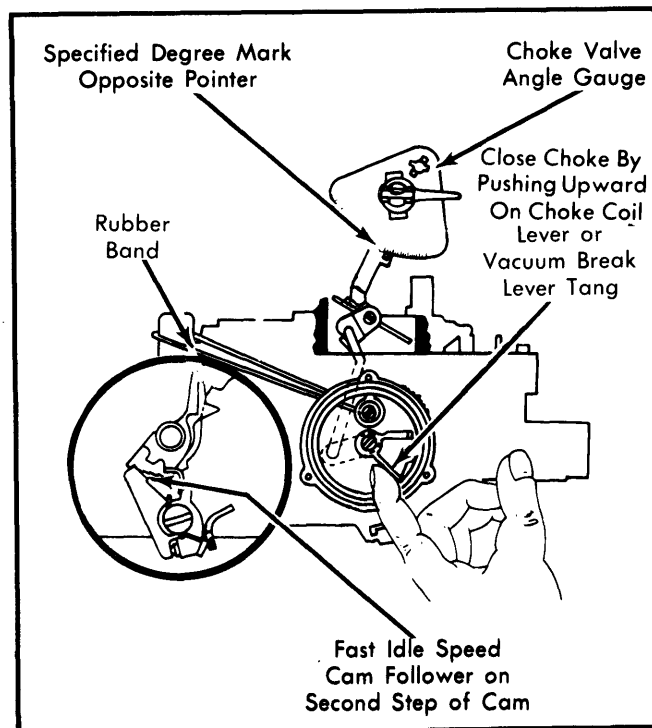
Adjusting Choke Rod (Fast Idle Cam)
